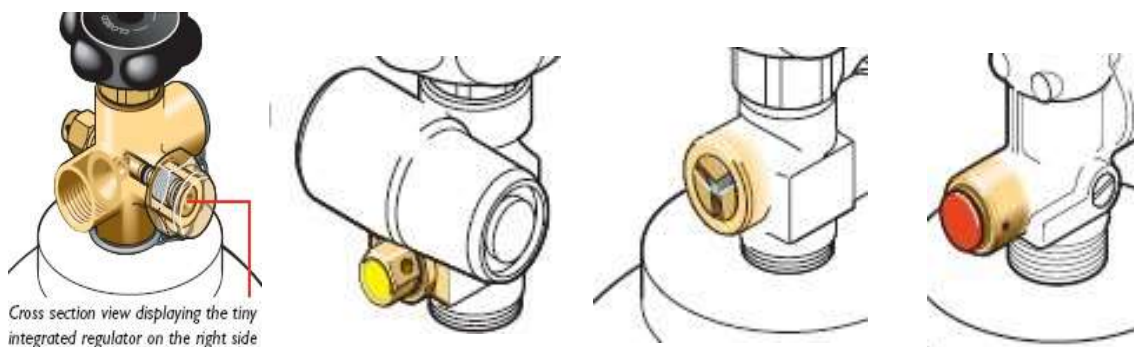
Typical pressure relief devices fitted to cylinder valves. Top Left - Integrated regulator type for 300 atms cylinders, Burst disc type, Fusible plug type, STD pressure relief valve.
